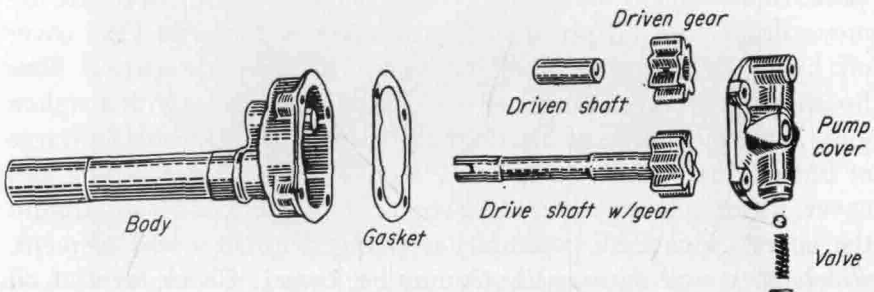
Gear-type oil pump disassembled. (Chevrolet Motor Division of General Motors Corporation)
